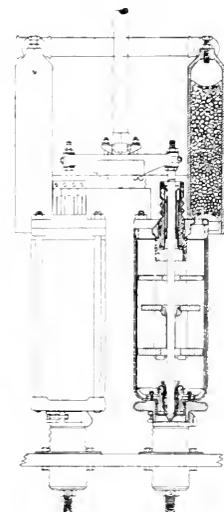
Arrangement of Oil Tanks and Separating Chambers
